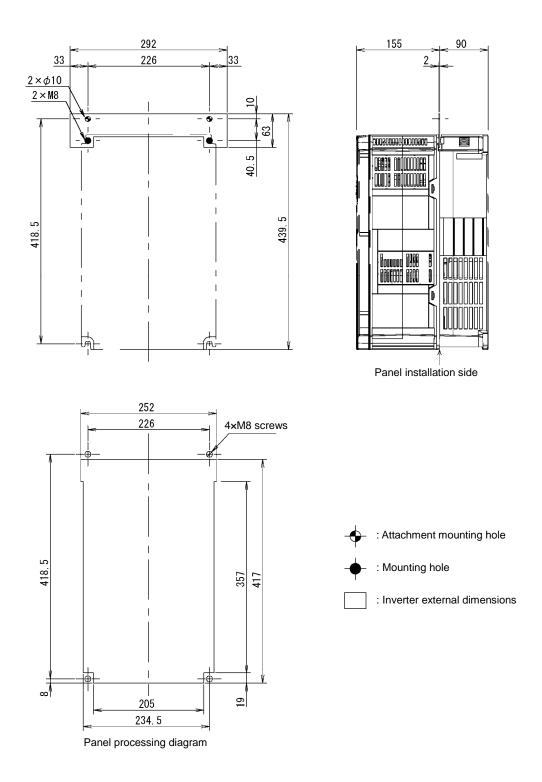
External Cooling Attachment External Dimensions (continued)
